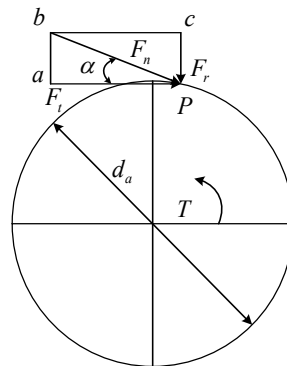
Force Analysis of Spur Cylindrical Gear Teeth
